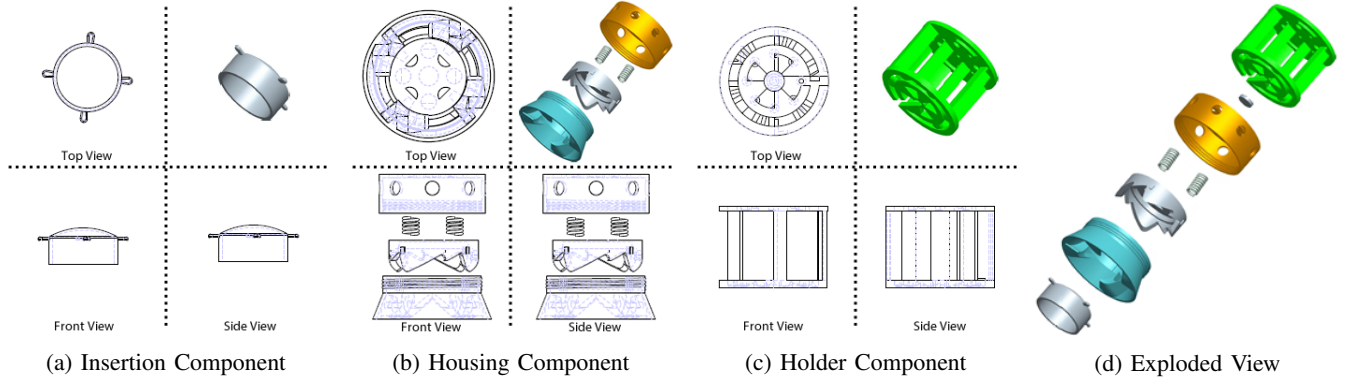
Schematics of each mechanism component and an exploded view of the components.
